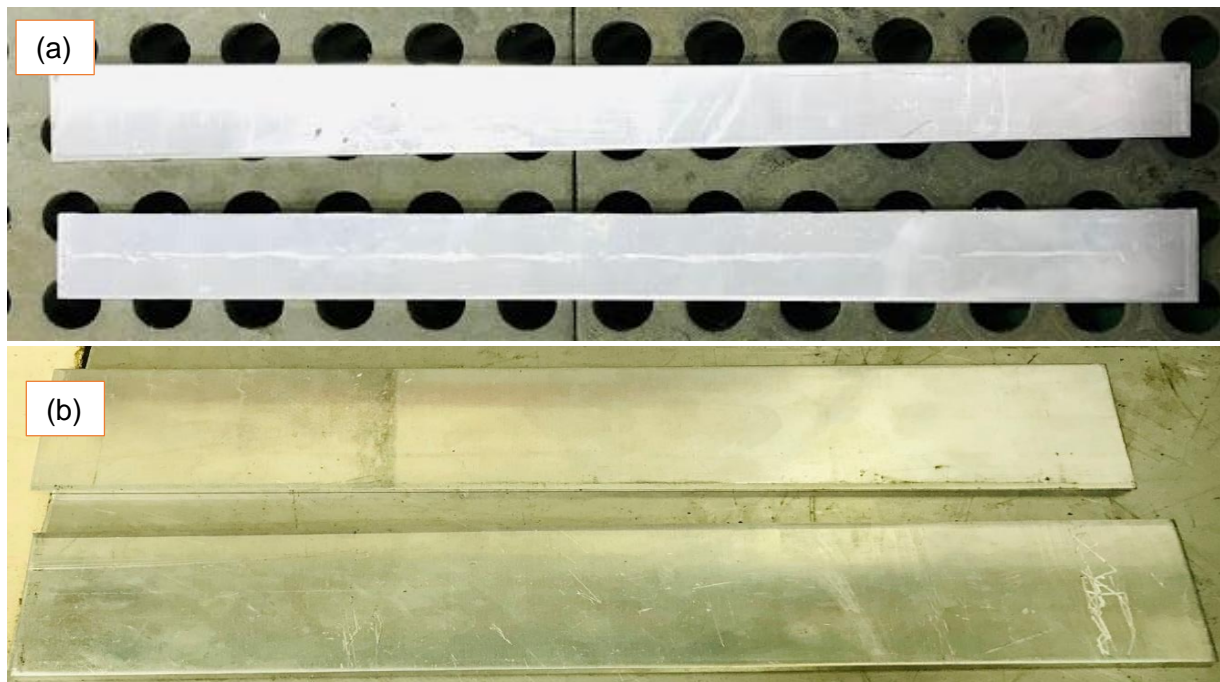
(a) Aluminium alloy plates before cutting, (b) Cut aluminium alloy plates to fit the FSW backplate ready for welding.
